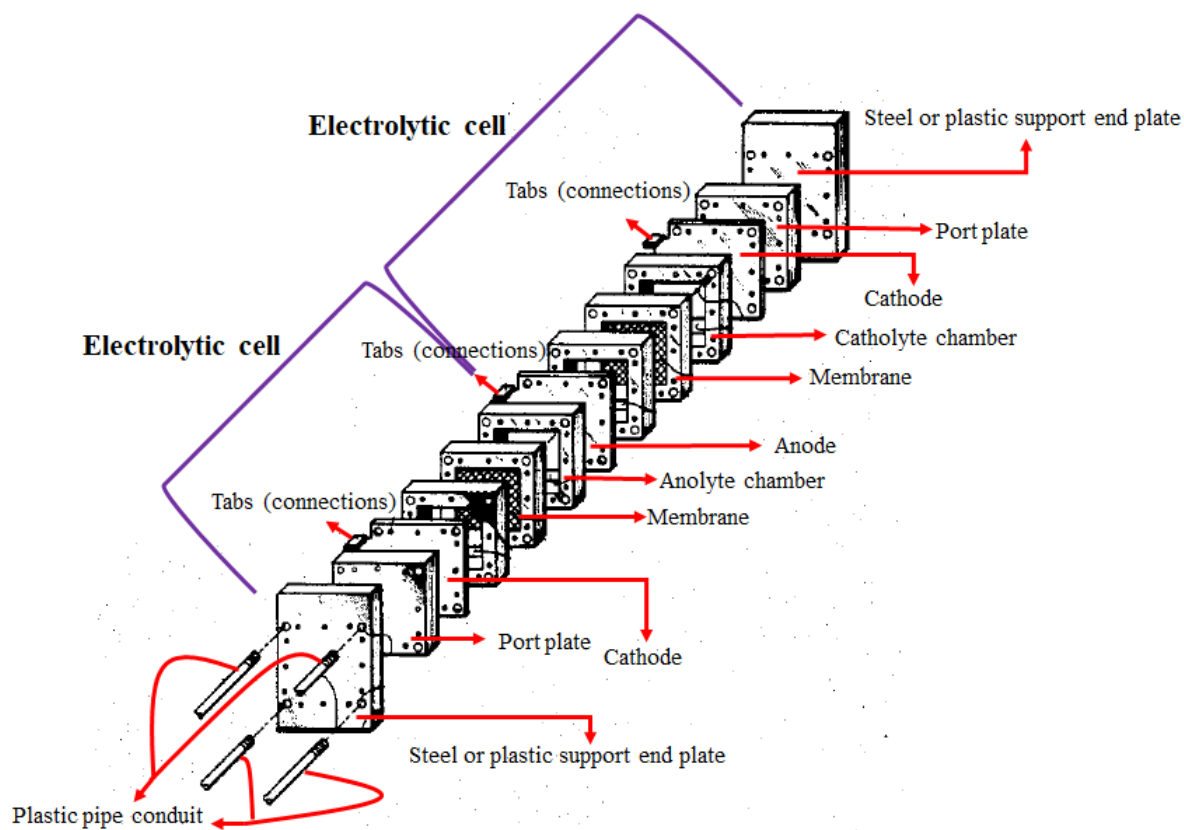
Exploded view of a multiple plate electrochemical reactor assembly [57].
